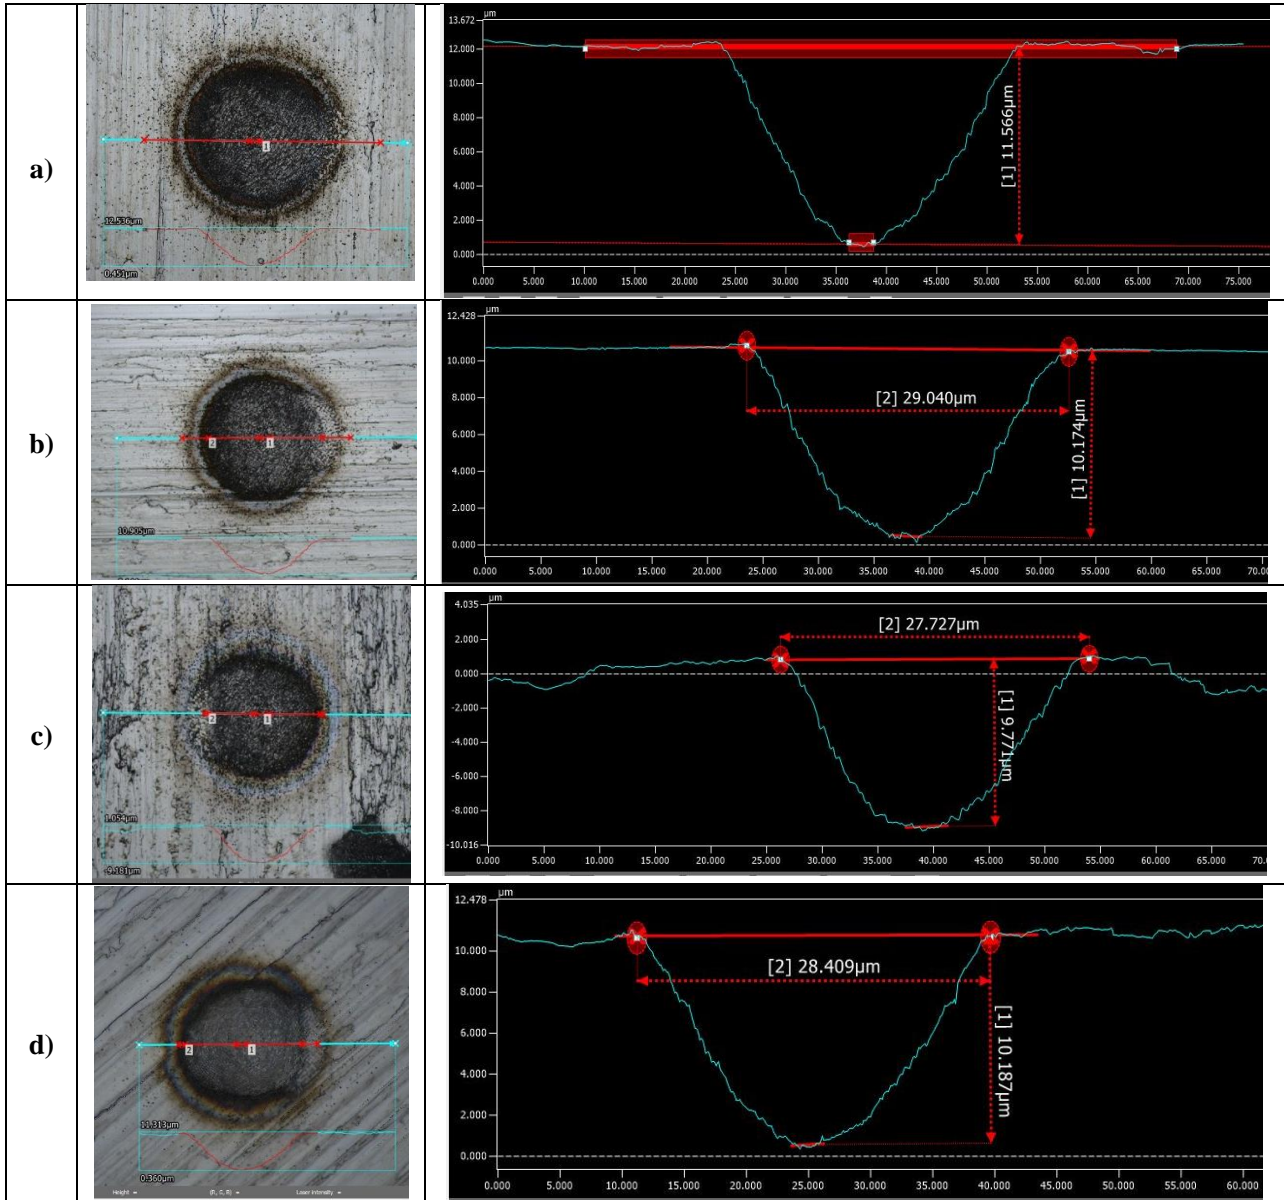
Examples of the dot structure fabricated in the tested materials: left – 2D image, right – depth profile, a) Tool steel; b) Inconel 718; c) Ti6Al4V; d) Stainless steel.
